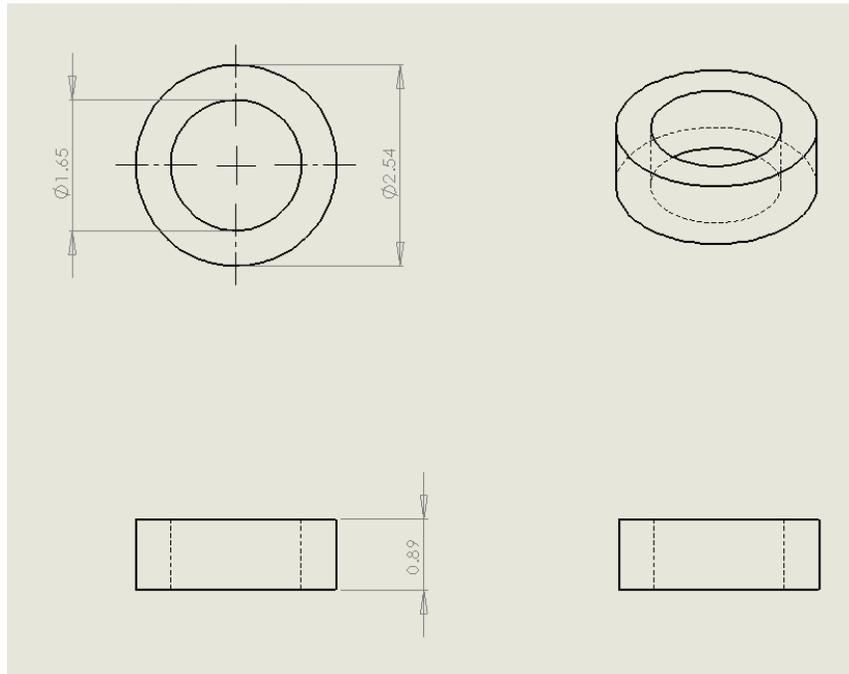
Three Angle View of Alignment Ring. The above drawing shows the construction of our initial alignment ring prototype. Dimensions, shown in centimeters, should be proportionally scaled according to the necessary size of the alignment system. The alignment ring can be manufactured using a drill press in one inch stock, as well as in a water jet from thick sheet plastic.
